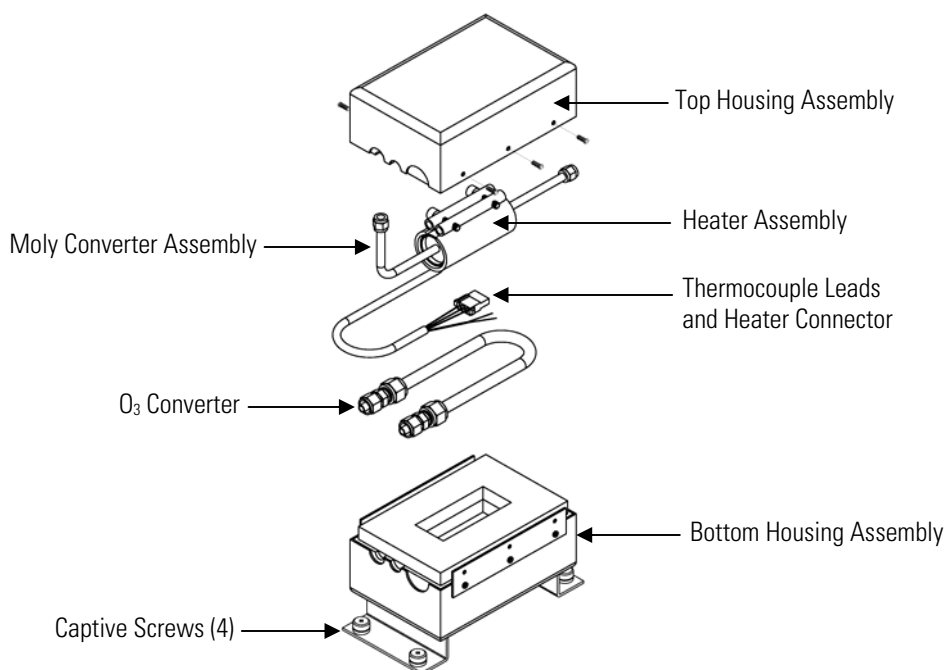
NO₂-to-NO Molybdenum Converter Assembly
